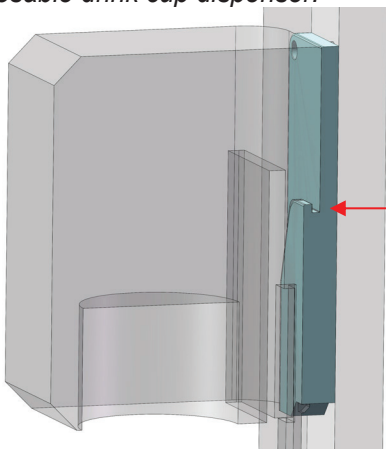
Stepped lip on wall-mounted bracket utilizing a tapered nesting fit.
